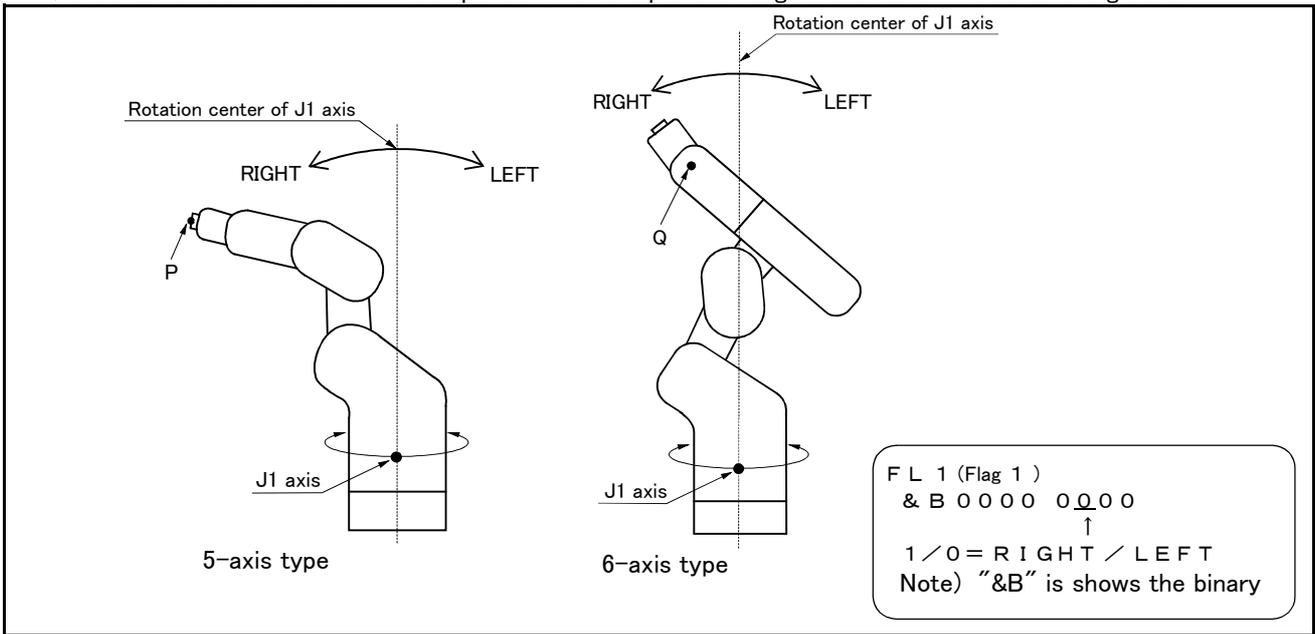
Configuration flag (RIGHT/LEFT)
